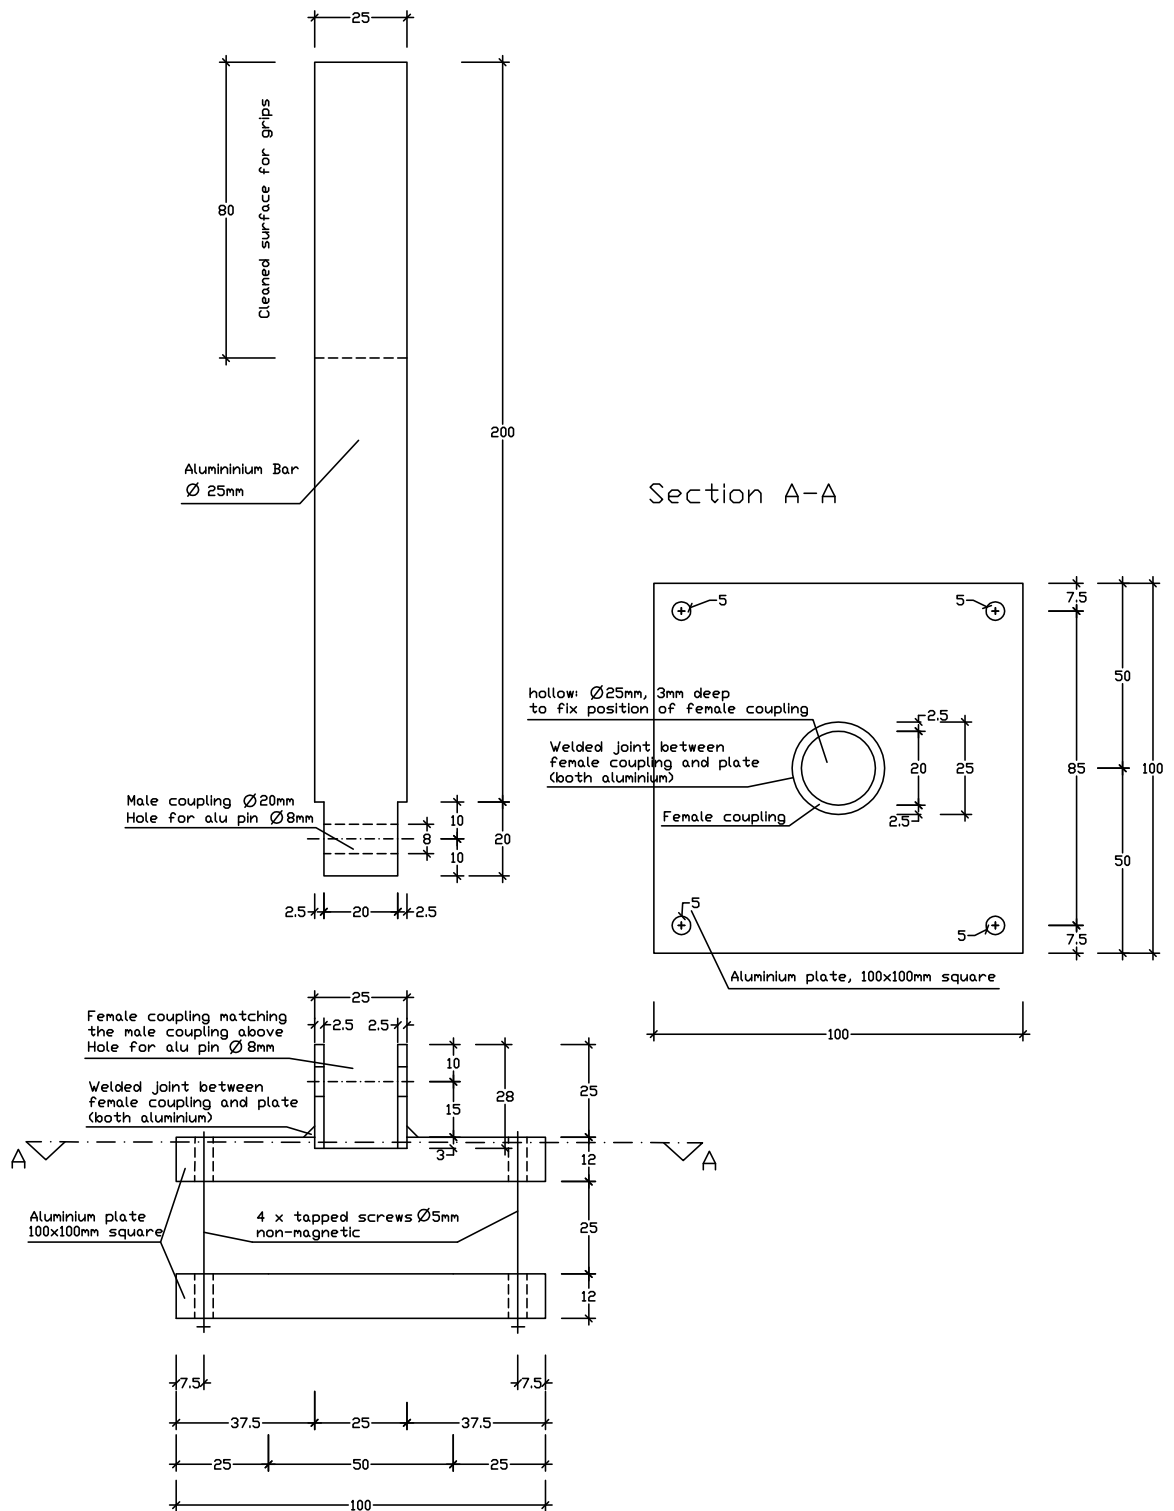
Technical drawing of the top part of the test rig structure used for compression tests.
